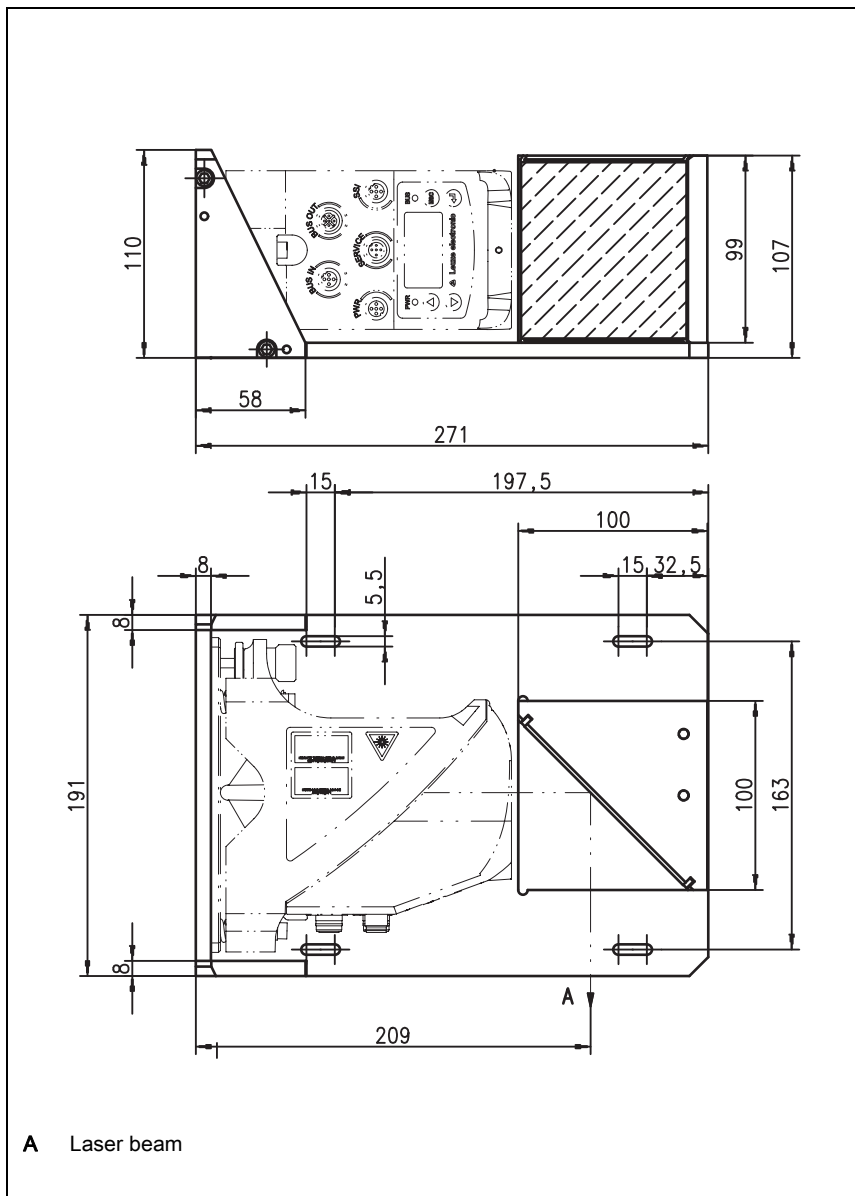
Dimensioned drawing of US AMS 01 deflector unit
